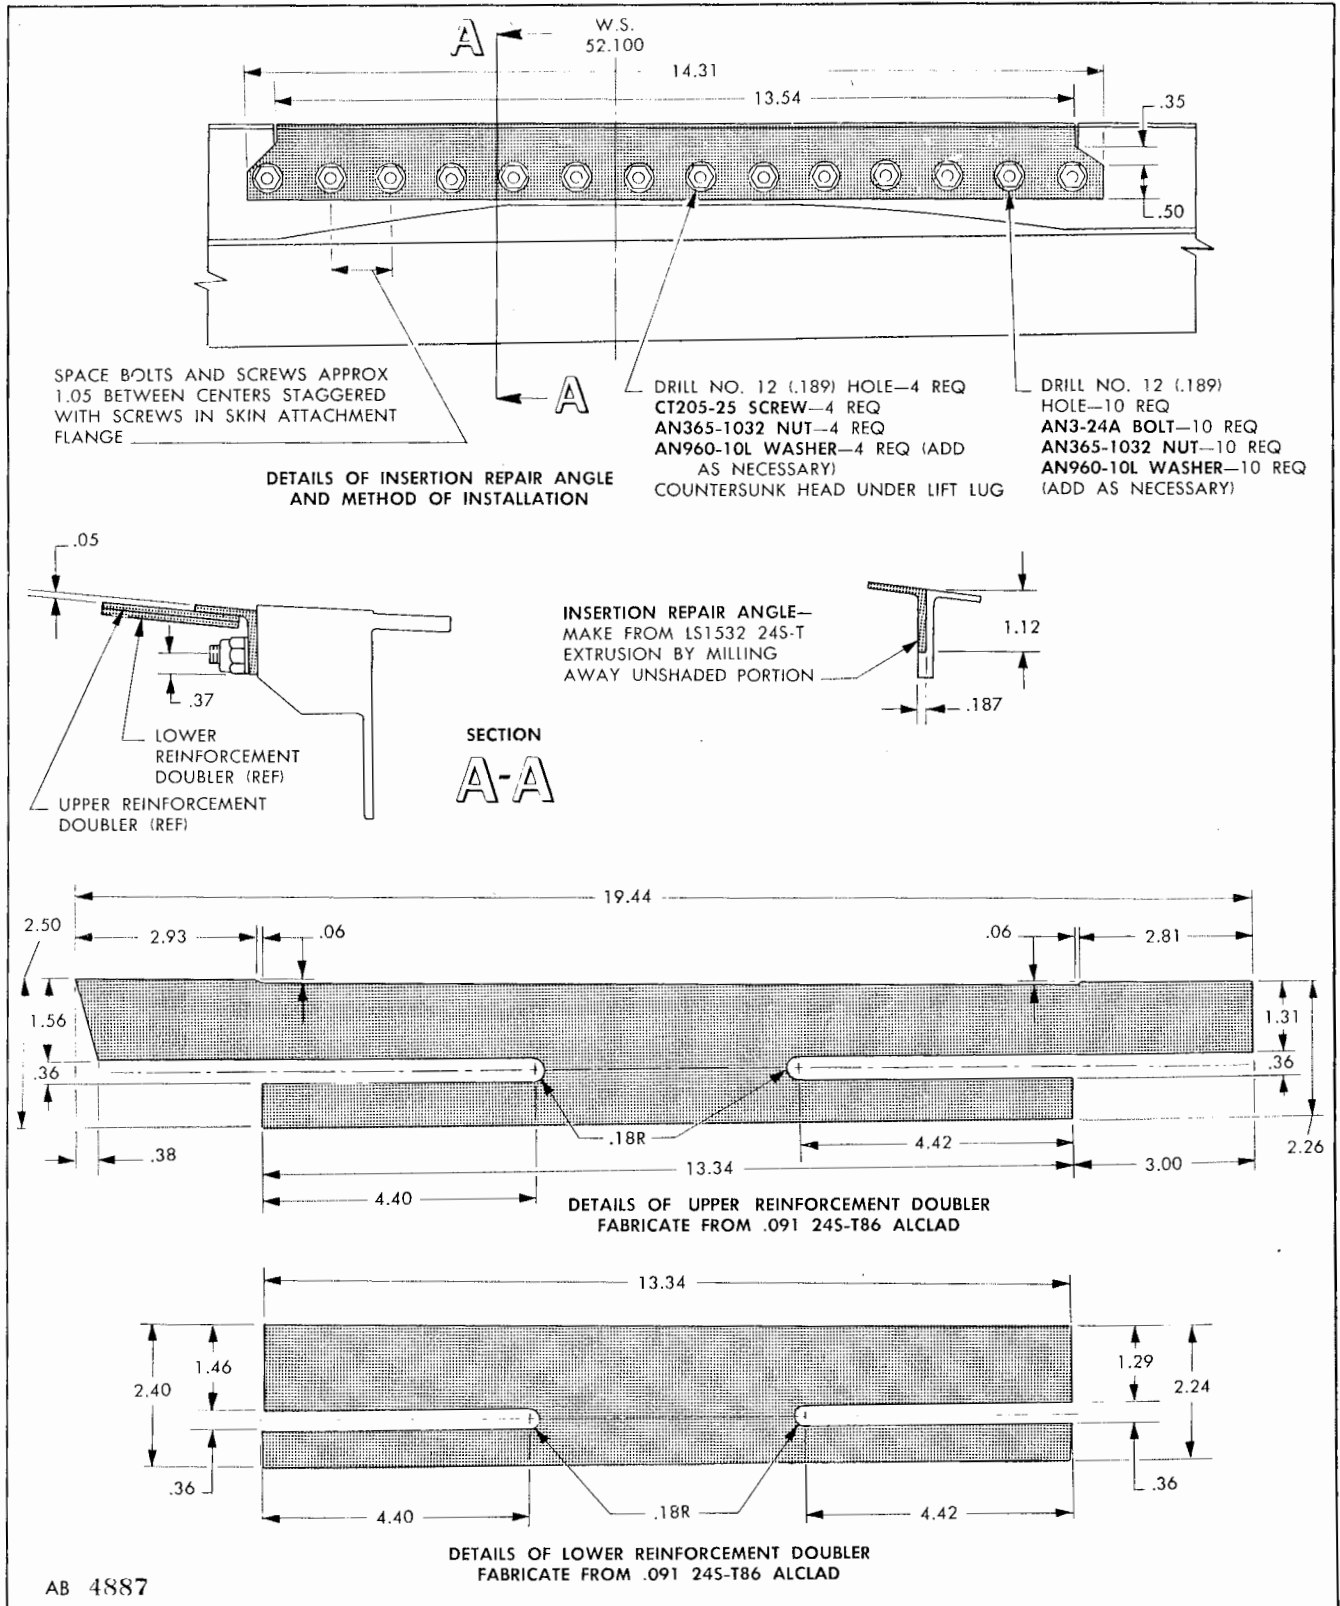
B (Sheet 2 of 3 Sheets) — Repair of Wing Upper Surface and Rear Beam Skin Attachment Flange
